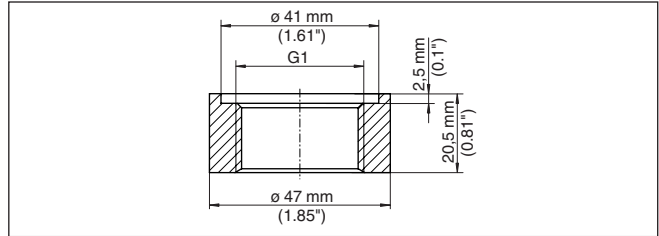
Dimensions of welded socket, thread G1 (DIN 3852-X)
